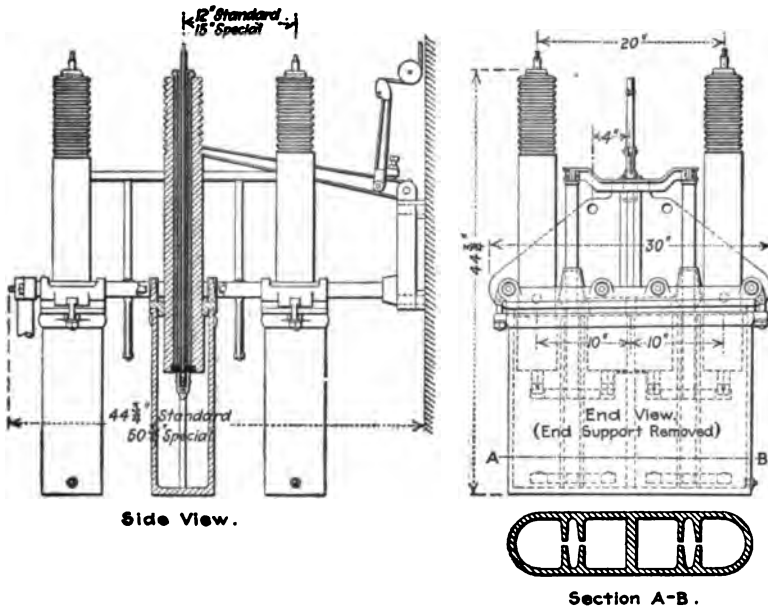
Type H Oil Switch Cable Control for 60,000 Volts.
